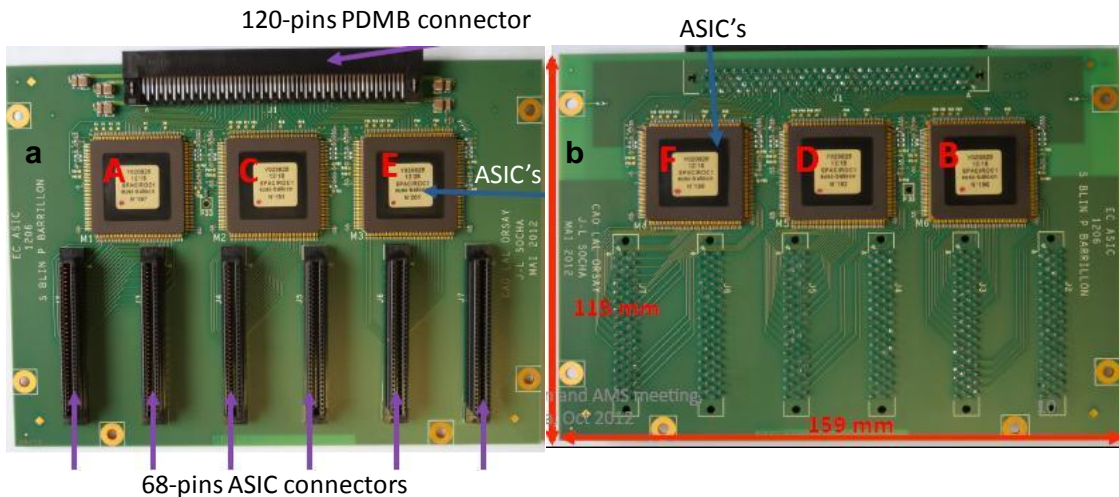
EC-ASIC a) top view and b) Bottom view [43].
